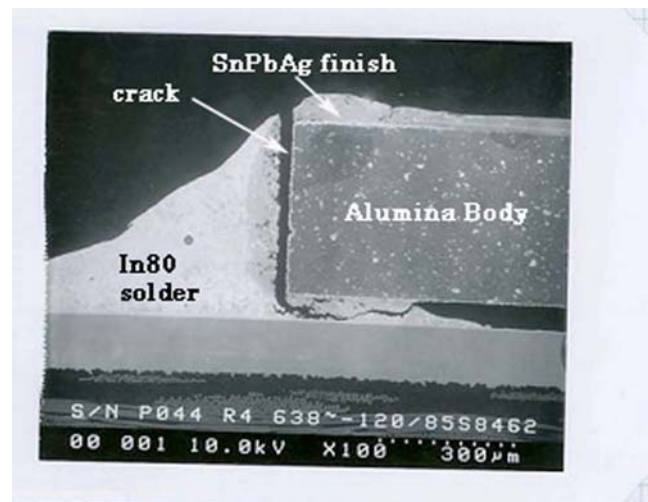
SEM Cross- Section View of R4 Endcap Cracking at Mag-100x and 10keV
